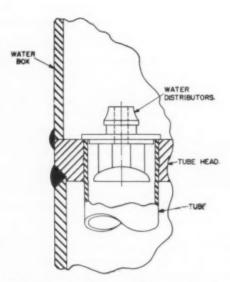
DISTRIBUTOR PROVIDED WITH EACH TUBE
